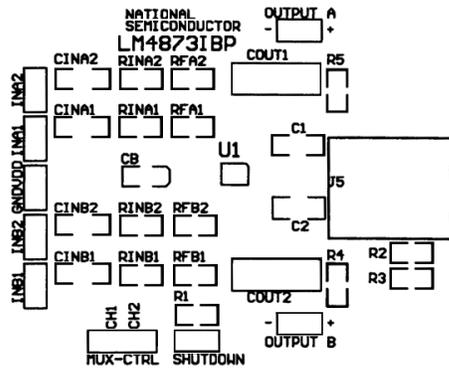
Recommended 20-pin DSBGA PC Board Layout: Component-Side Silkscreen
